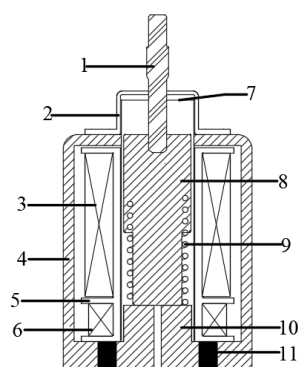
Structure of permanent magnet trip device. 1—Drive rod; 2—Limit housing; 3—Reset coil; 4—Magnetic yoke; 5—Coil frame; 6—Tripping coil; 7—Copper sleeve; 8—Moving iron core; 9—Reaction spring; 10—Stationary iron core; 11—Permanent magnet.
